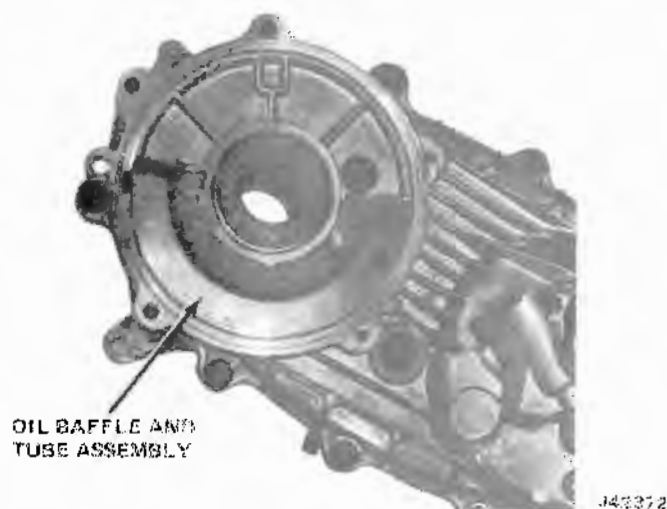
Reduction Oil Baffle and Tube Assembly Installed
